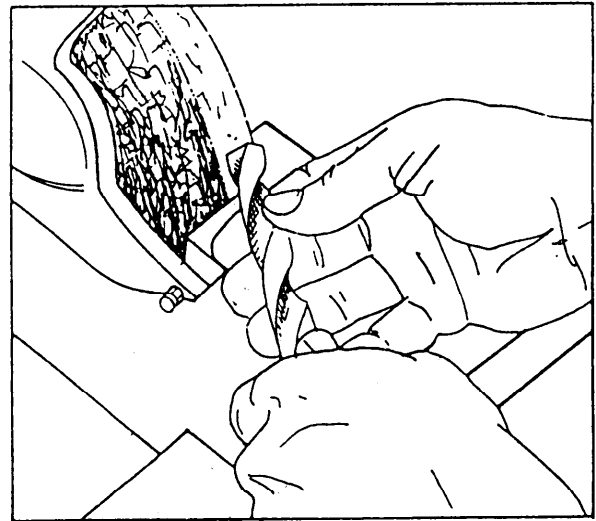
Grinding a twist drill with a grinder (initial position).
